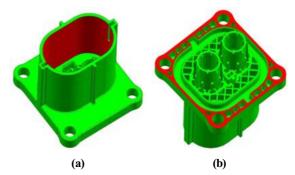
Geometric shape of 2P Header HSG((a) top view, (b) opposite view)
